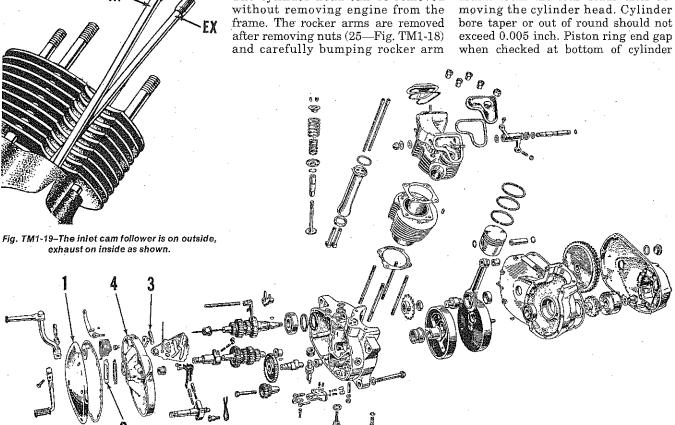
Exploded view of the engine assembly used on early models. Late models are similar.
